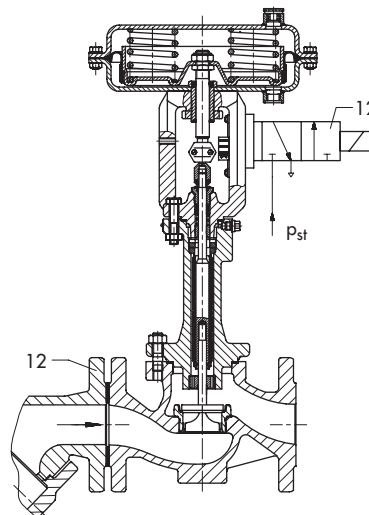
Type 3241-1-Oil with bellows seal and plug with high-performance metal seal
